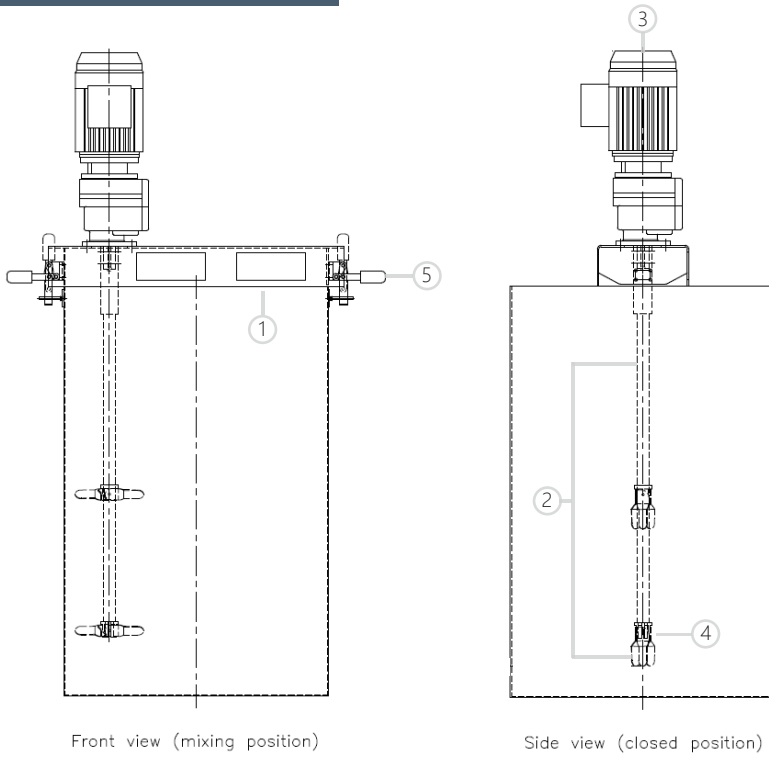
"Collapsible" folding impellers for entry to all standard drum containers.
